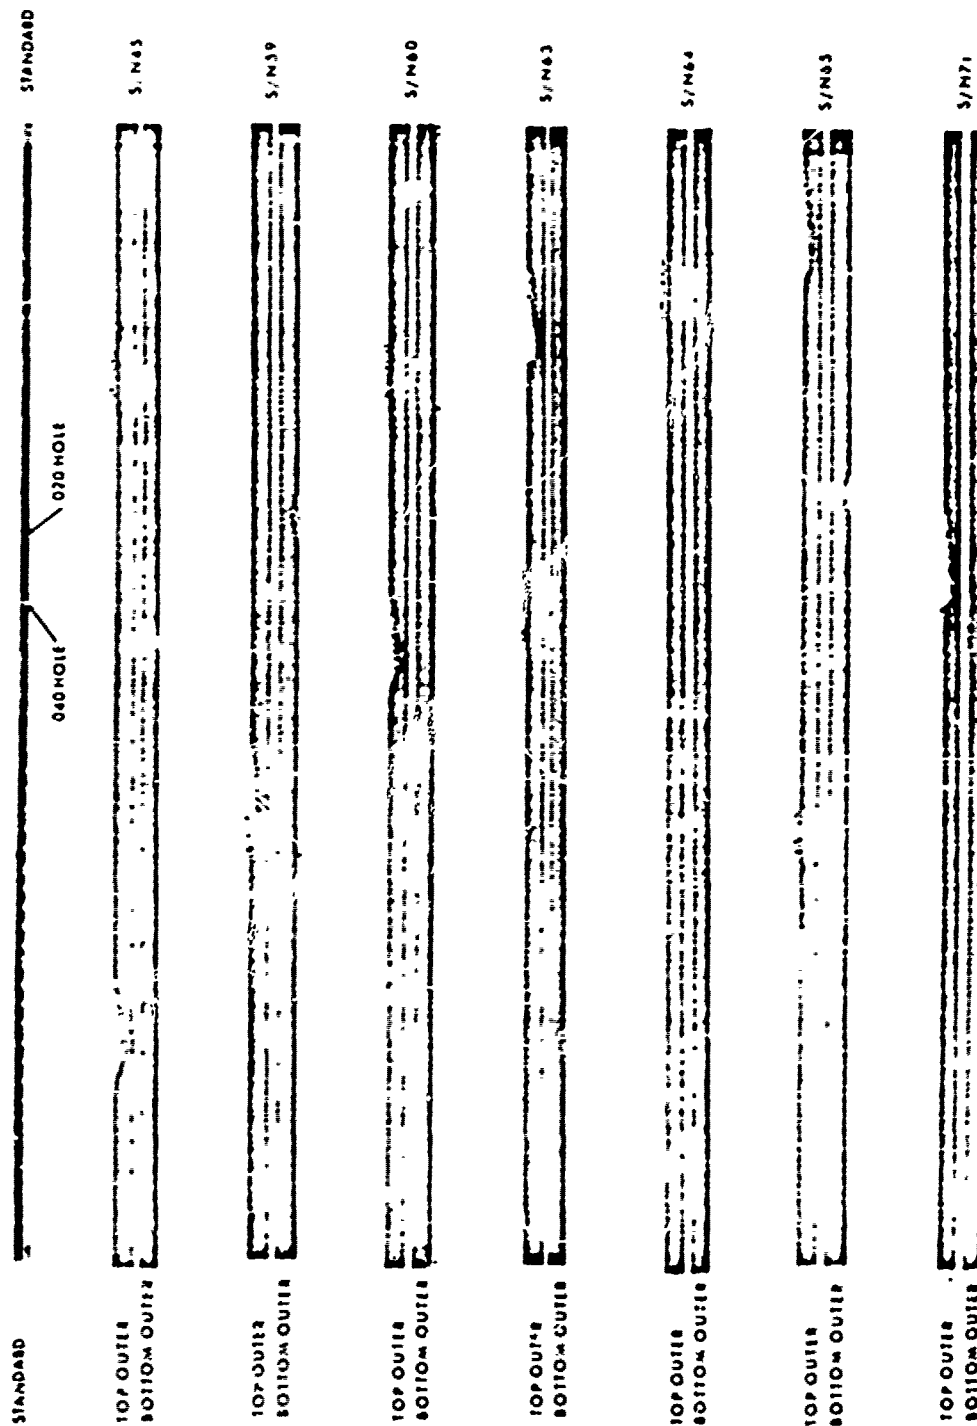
Ultrasonic Inspection C-Scans, Second-Row Gear After 50-Hour Test
